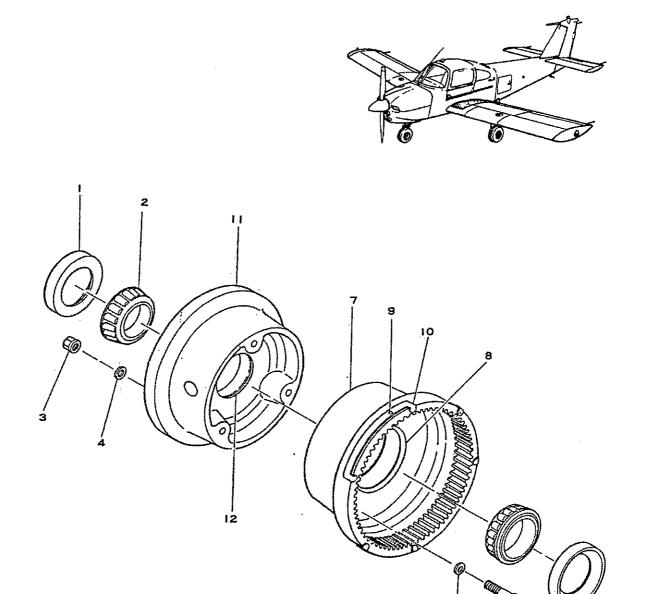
WHEEL ASSEMBLY, MAIN LADING GEAR (USE WITH TUBE TYPE TIRE)
